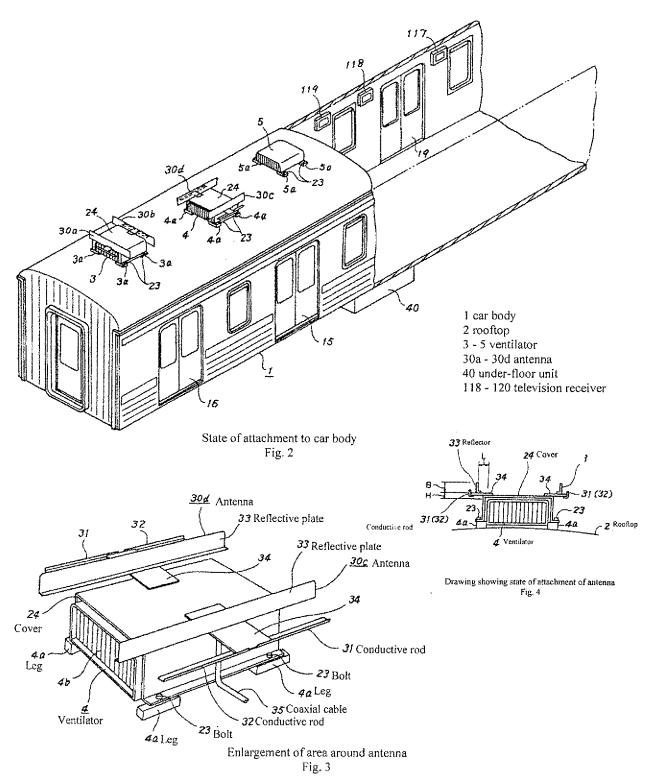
is a block diagram showing an embodiment of the present invention. Fig. 2 is a partial cutaway perspective view showing the state of the system of an embodiment installed in a car body. Fig. 3 is a perspective view showing the important parts of an embodiment. Fig. 4 is a side view showing the important parts of an embodiment. Fig. 5 is an explanatory diagram showing the state of use of the memory of an embodiment. Fig. 6 is a flow chart to
